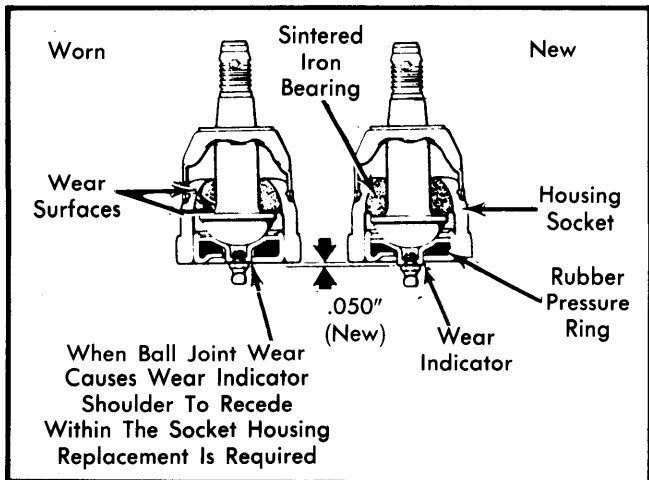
Lower Ball Joint Wear Indicators (General Motors)
